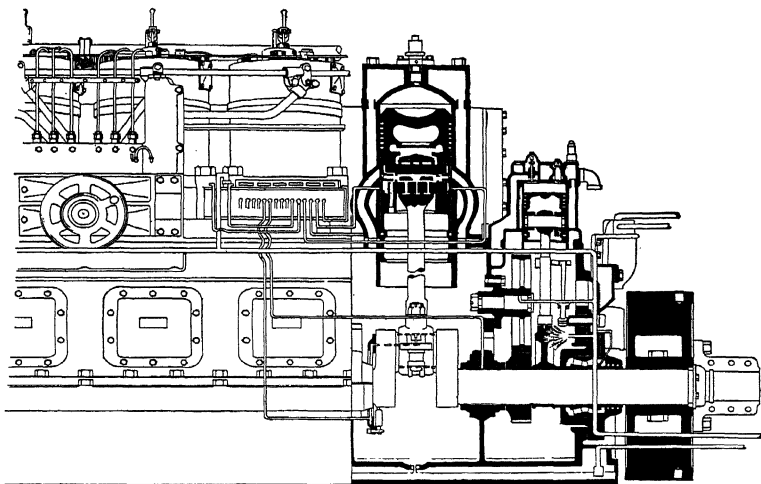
Two-stroke-cycle, single-acting, marine Diesel engine with solid injection. (Courtesy Socony-Vacuum Oil Co.)
